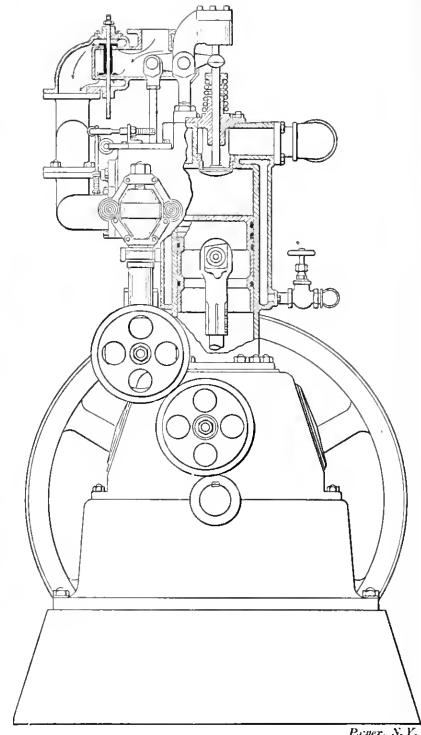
PART SECTIONAL ELEVATION OF ENGINE
